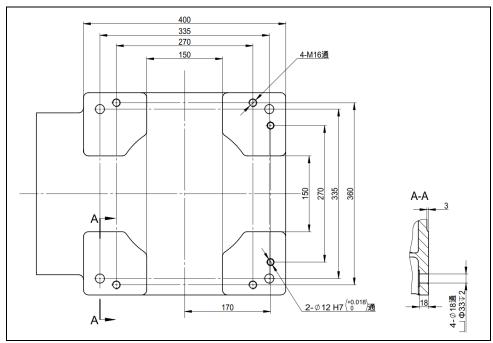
Robot base mounting dimension (QRH-405, QRH-405 Eco, QRH-405 Eco-S, QRC-405 Eco)
